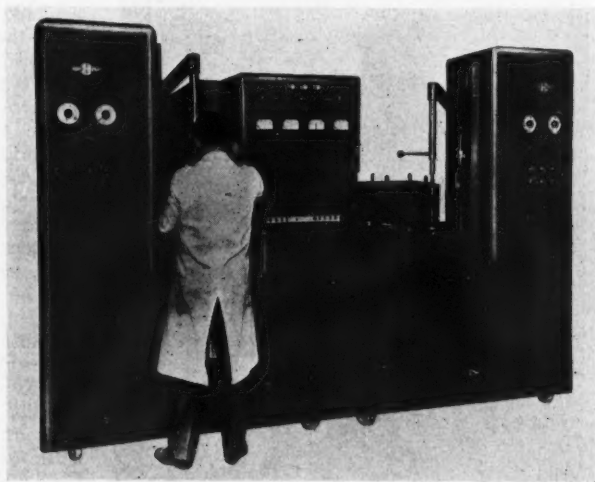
A 2-station induction hardening machine for gears, built by Induction Heating Equipment, Ltd.
